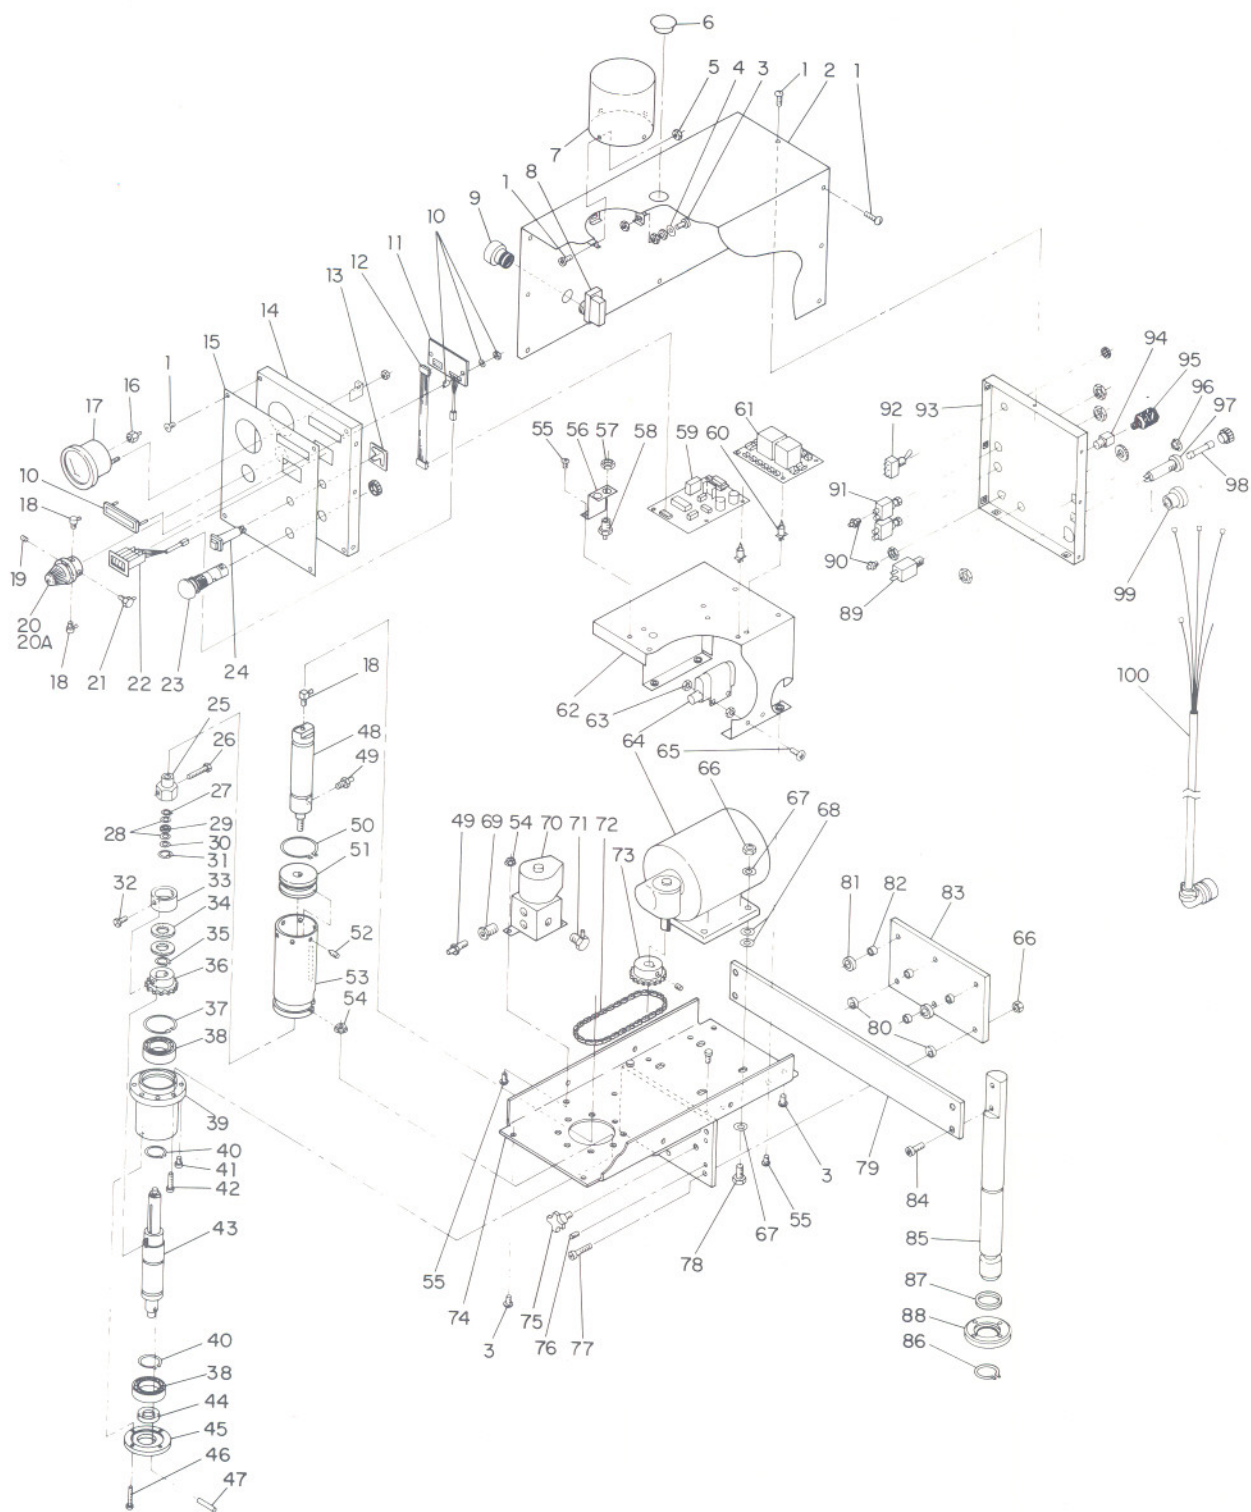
EUROMET™ I POWER HEAD ASSEMBLY DETAIL
